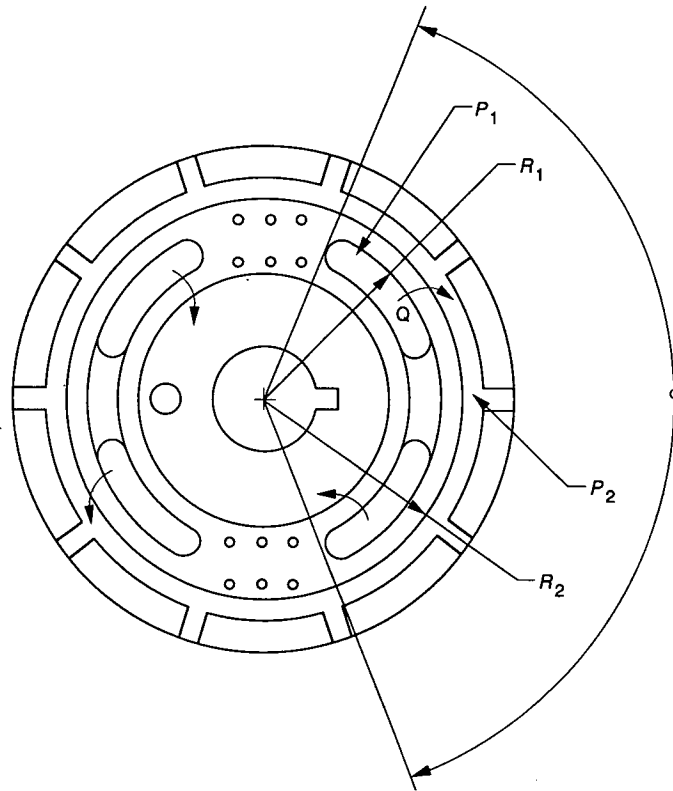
Leakage flow paths across the valve plate sealin surfaces to the motor case.
